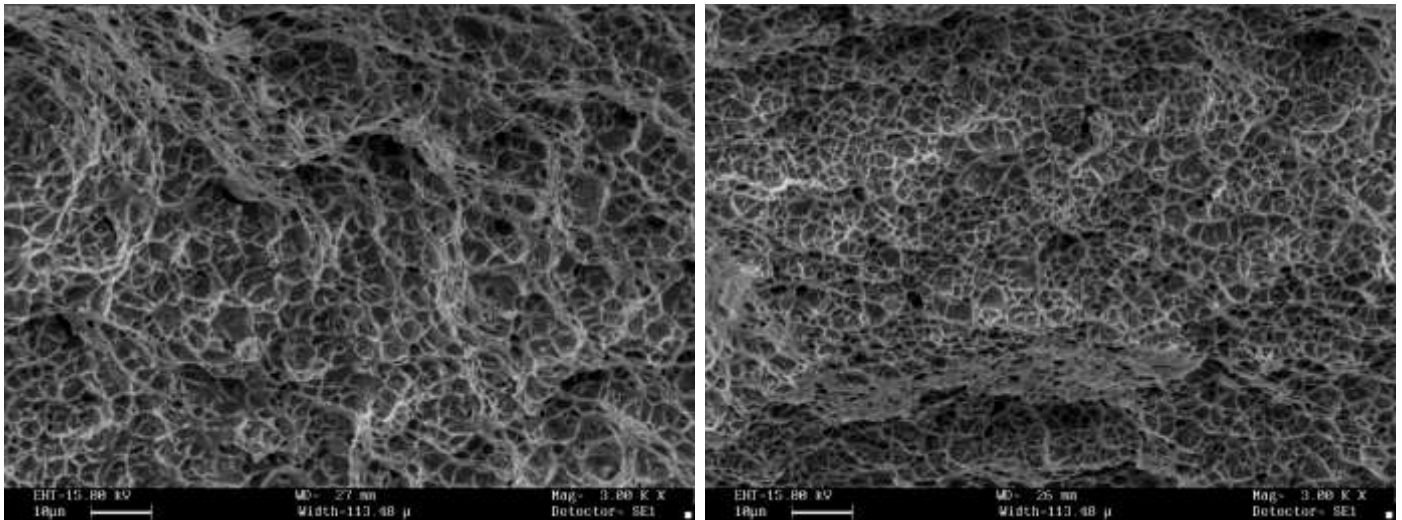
SEM picture of MMA welded sample 'austempered' fracture surface
